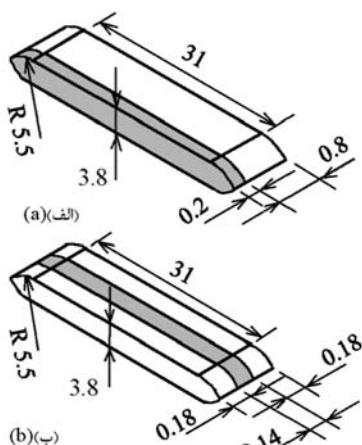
Test specimens; (a) two layered sheet, (b) three layered sheet
